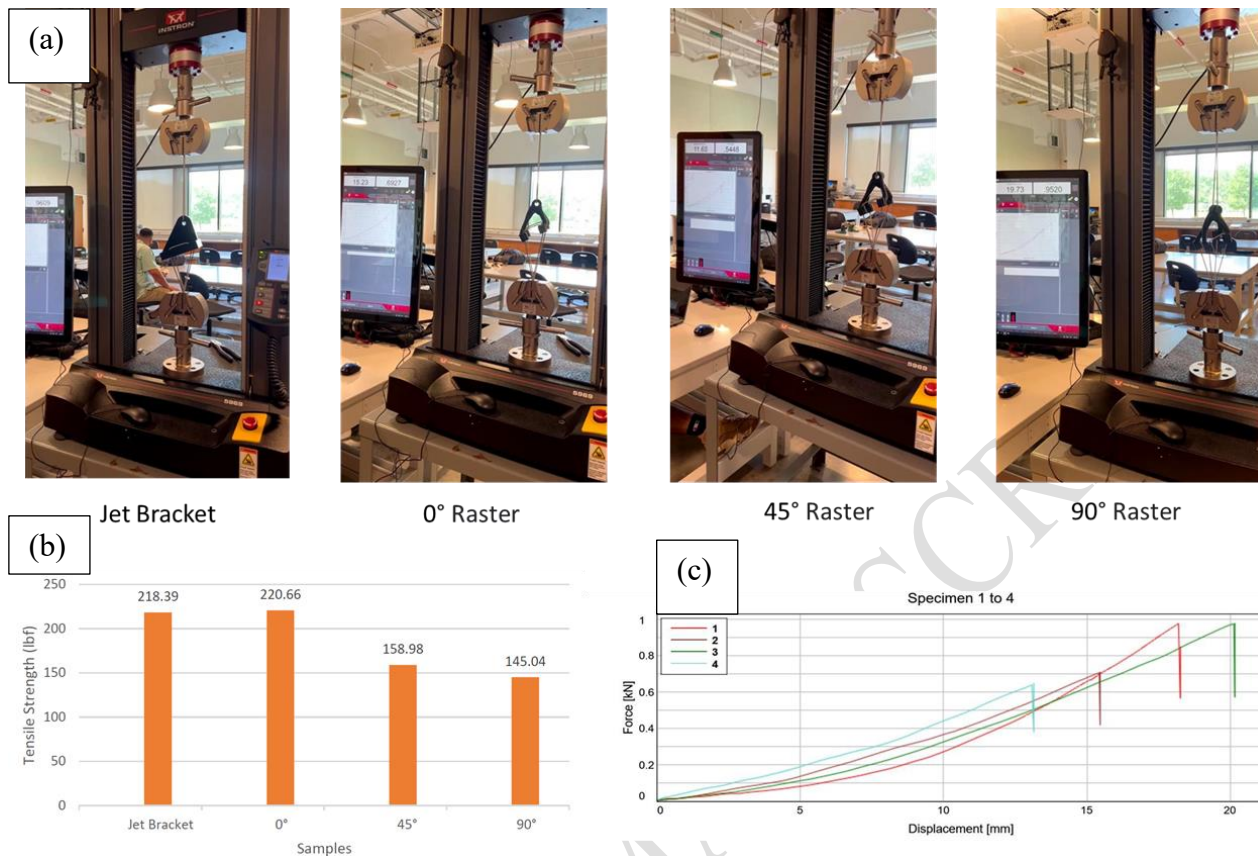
Representative image of the testing of the brackets and results: (a) testing of jet engine bracket at the University Tensile Testing Machine using custom-made test fixtures, (b) comparative study of the tensile strength properties (ultimate tensile stress) of the various design of jet bracket, and (c) load versus displacement graphs for the tensile testing of jet brackets.
